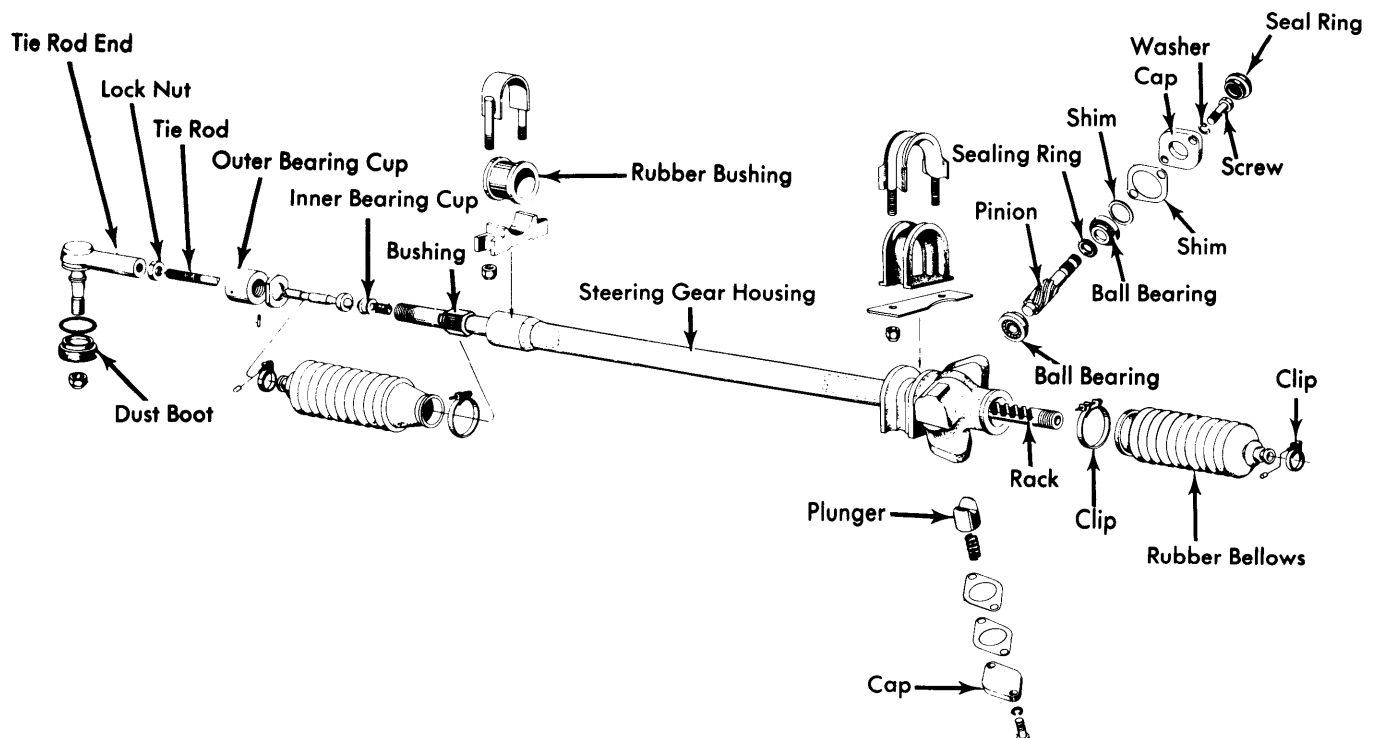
Exploded View of Saab Rack & Pinion Steering Gear Assembly
